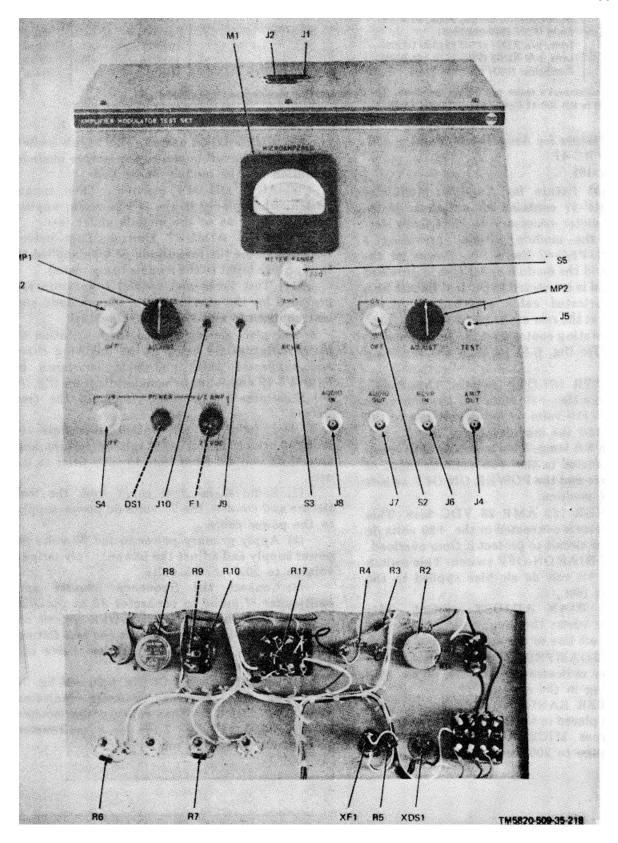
Test Fixture for Amplifier-Modulator AM-3507/PRC-47 Parts Location. 6-42
